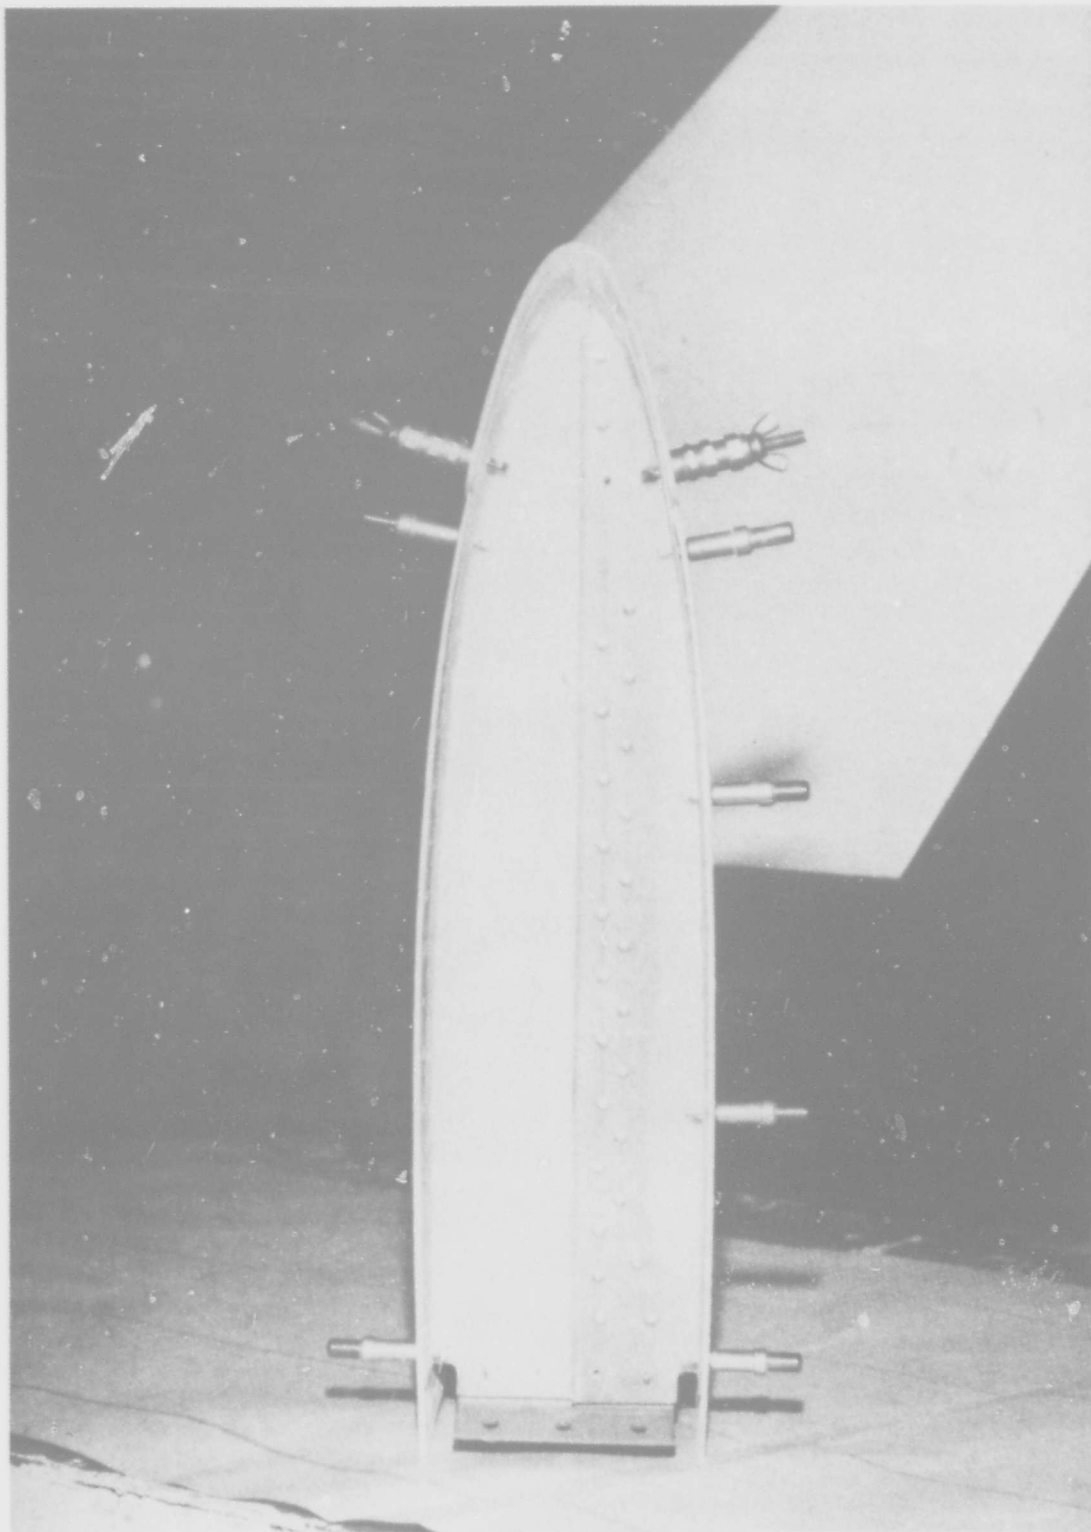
LEADING-EDGE TWO-PIECE RIB ASSEMBLY
